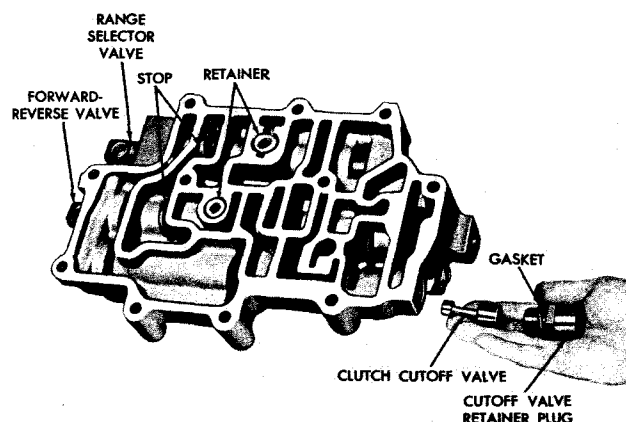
Removing (or installing) clutch cutoff valve components—later model
